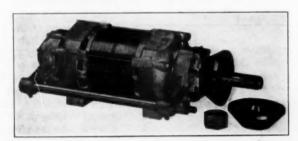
Motor-Mandrel Unit in Which Steel Shell Is Exposed and Bearings Are Unit with End Shields
